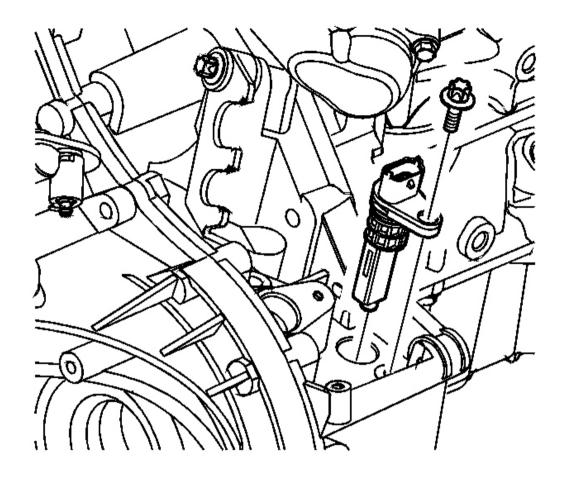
VSS & Retaining Bolt Courtesy of GENERAL MOTORS CORP.
